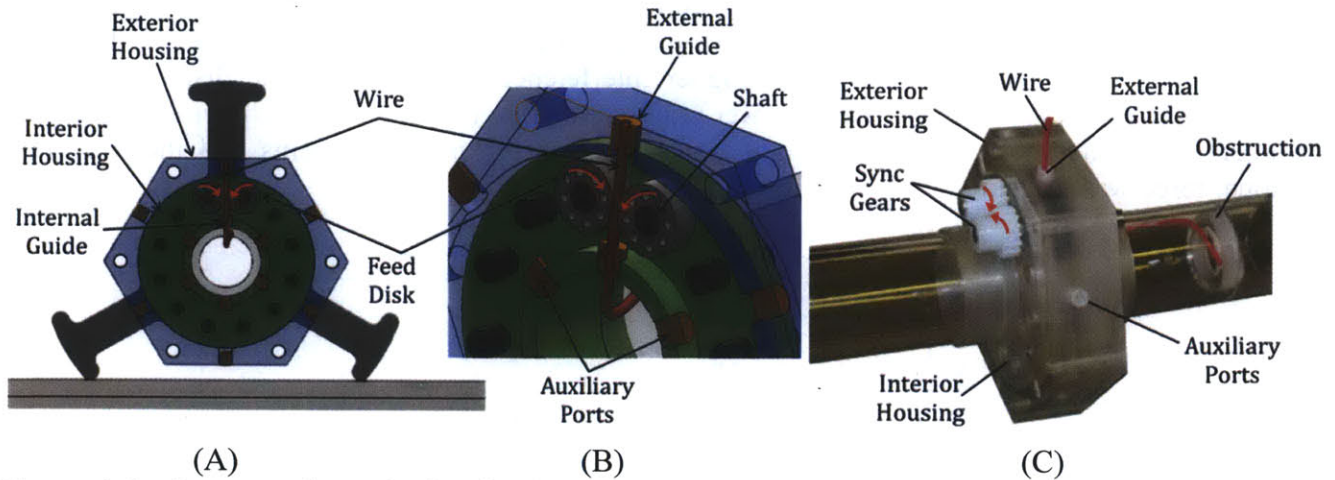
Cross section of wire feeding mechanism. A) is the front view showing the exterior housing around the mounting unit containing size entry ports. B) Wire entering through the external guide and being pushed by the drive wheels into the flow chamber through an internal guide. C) Photo of system showing the synchronizing gears that link the motion of the feed disks.
